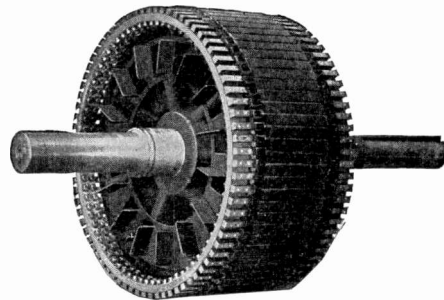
Iron Rotor Core for Westinghouse Induction Motor
